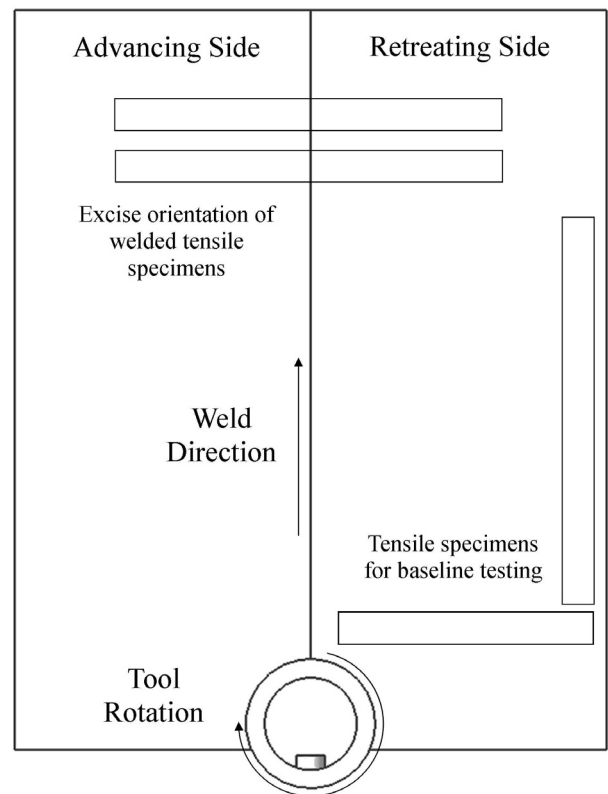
Excise Location of Tensile Specimens and Corrosion Coupons from FSW Panels
